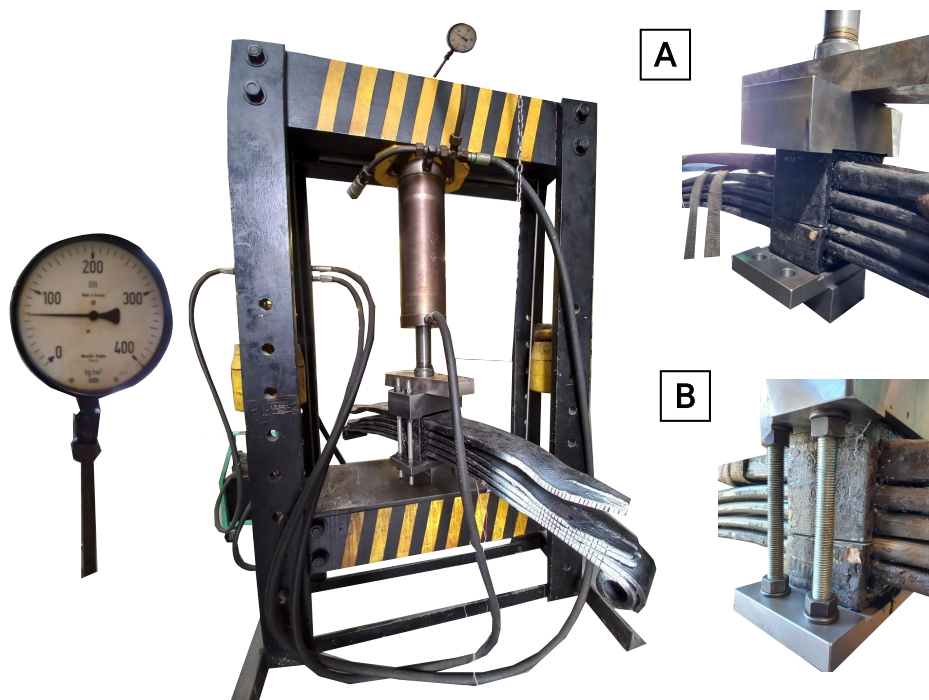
Illustration of the experimental setup needed to prepare the test sample: Left - Hydraulic Press at 70 bar, Right A - Screw removal and spring buckle cutting, Right B - Screw replacement [19].
